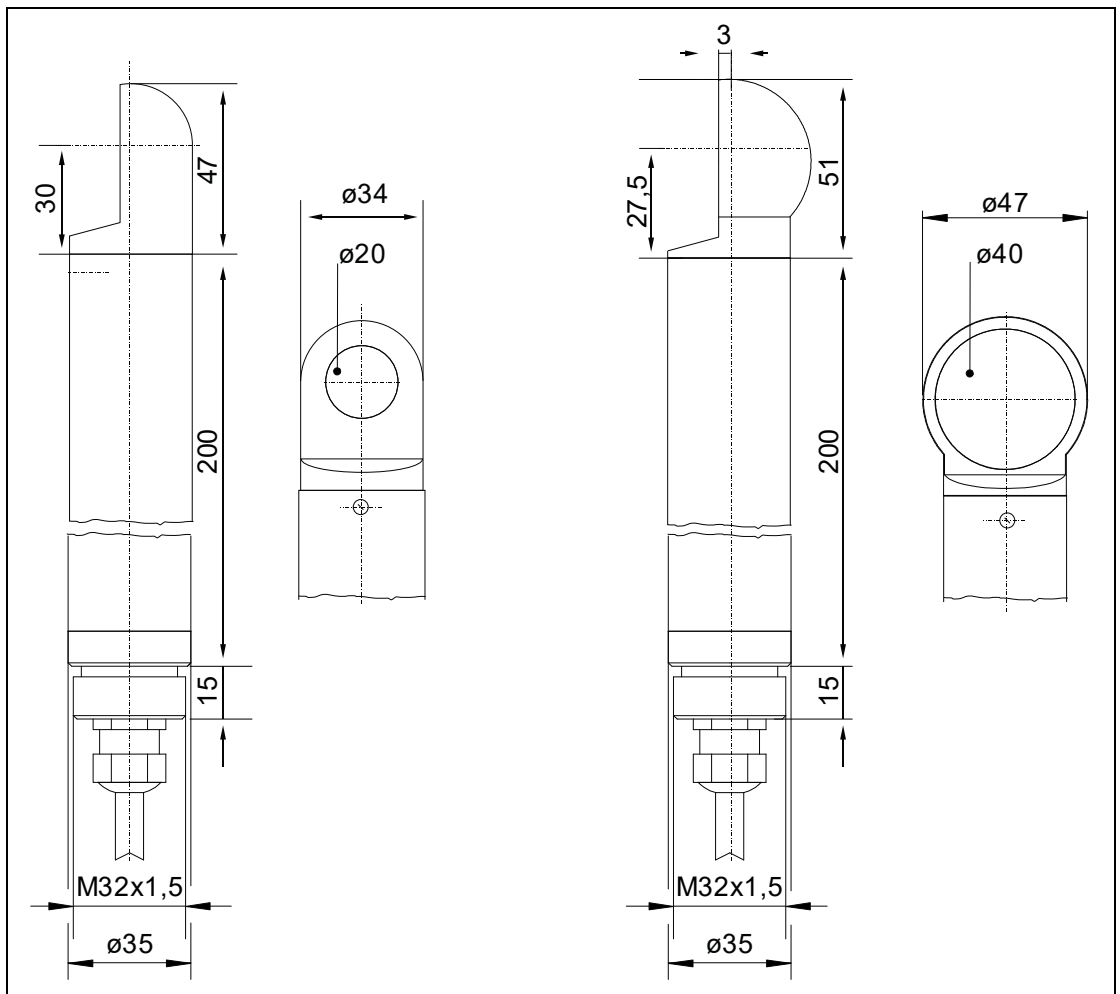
Dimensions rod sensor, type NOS $\phi 20/40$ mm
